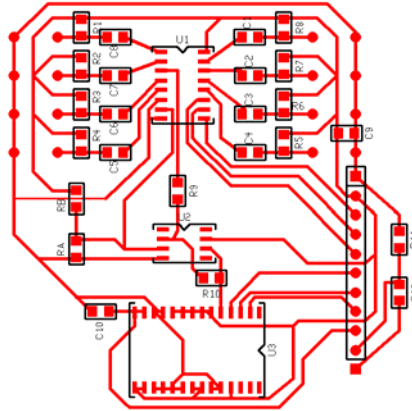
PCB layout for the flexible data acquisition circuit.
